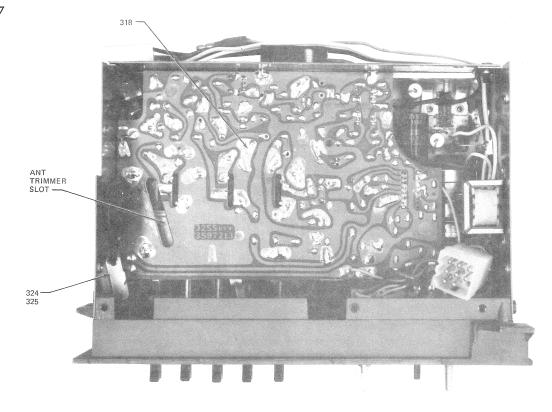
PARTS LOCATION, BOTTOM VIEW (3501457)
